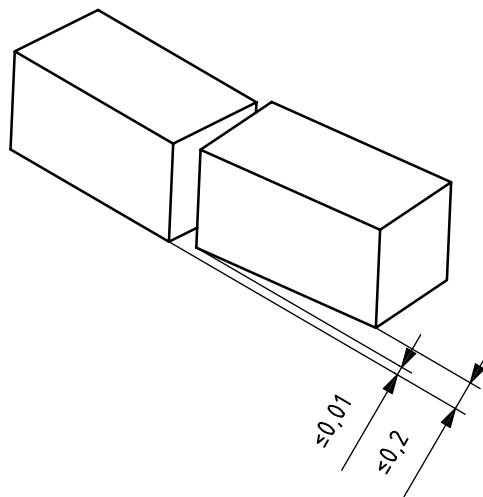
Specifications for the maximum permissible departure from parallelism of the clamping surfaces
